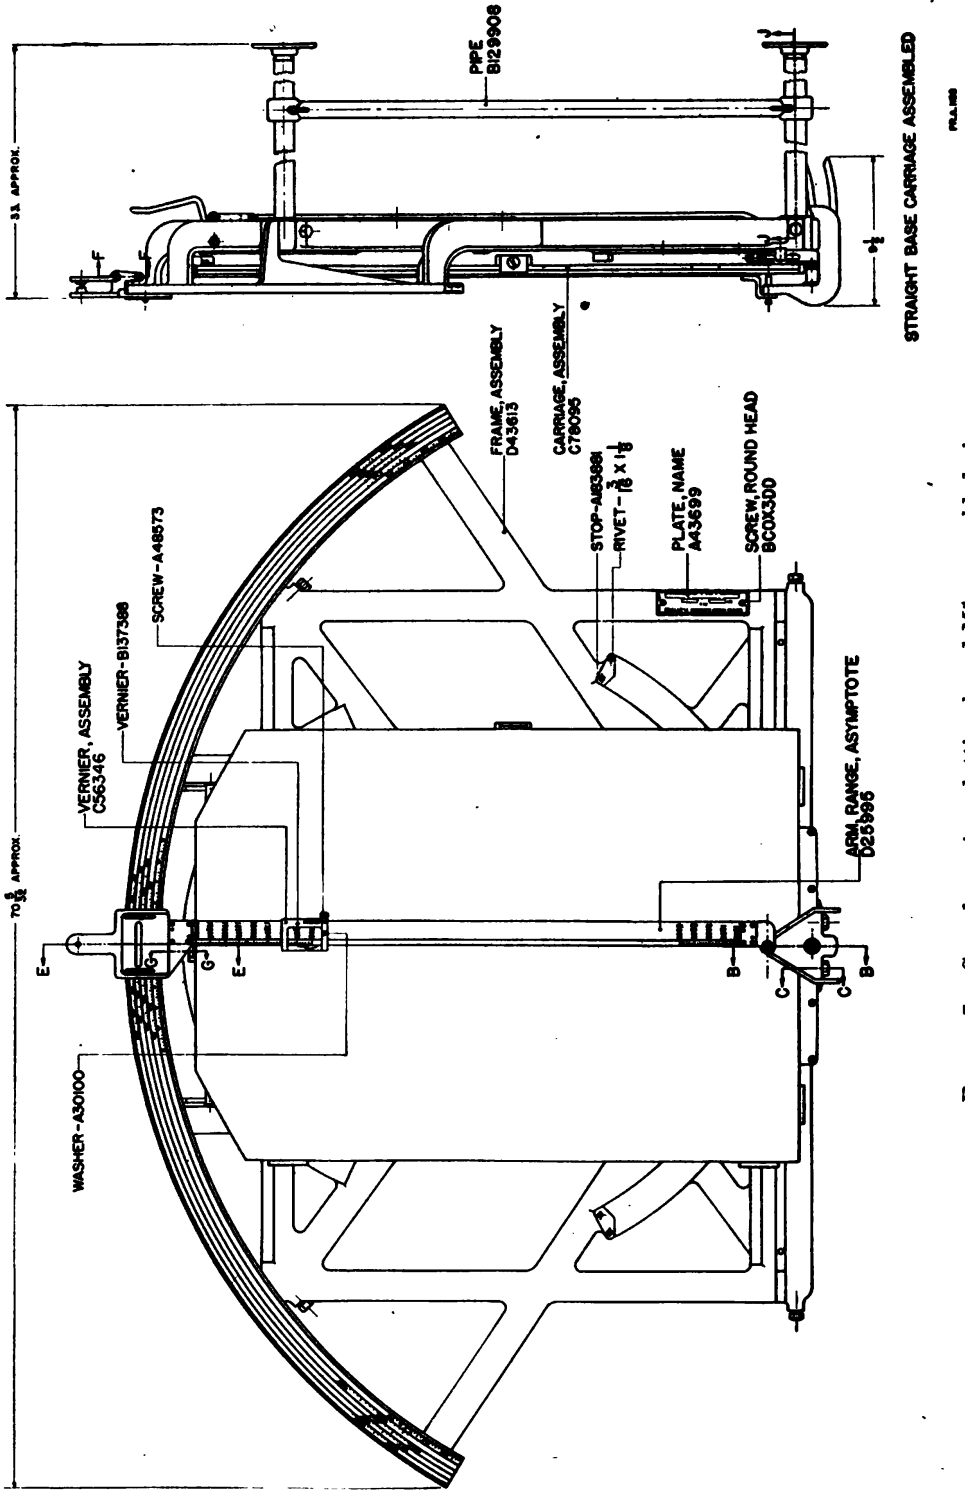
Sound ranging plotting board M1, assembled views.
